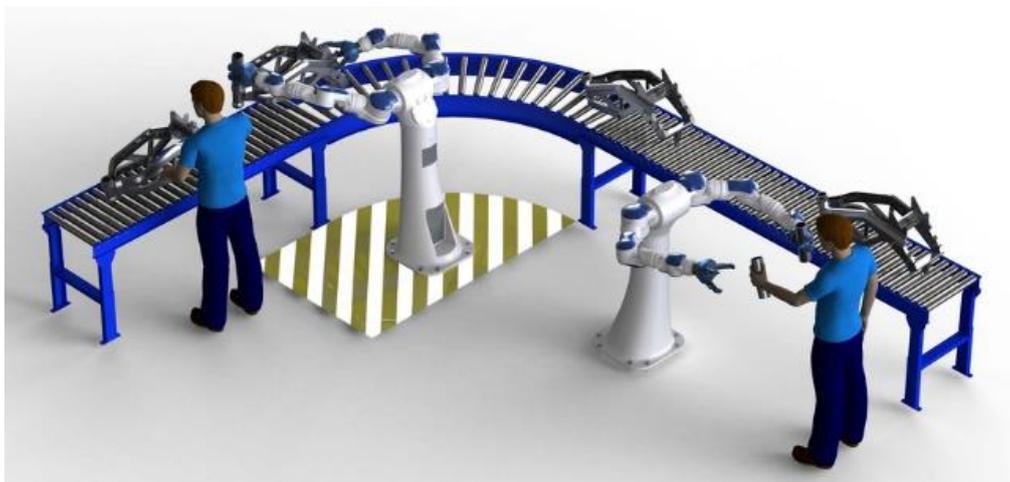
Assembly line example (from fierceelectronics.com)
